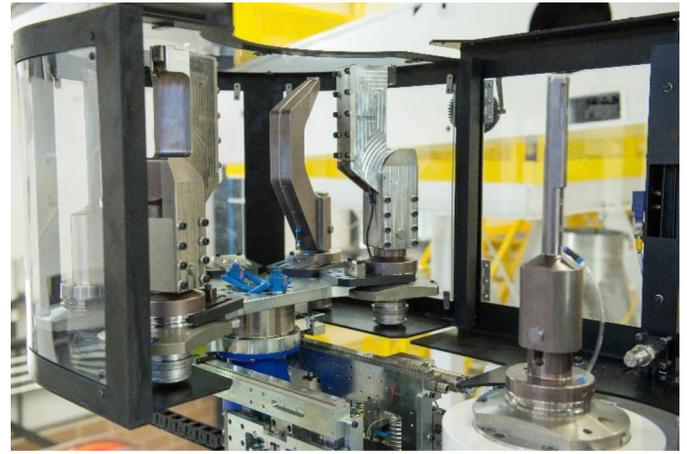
Crescent shaped carousel and fastening head (carousel shown in expanded position)
